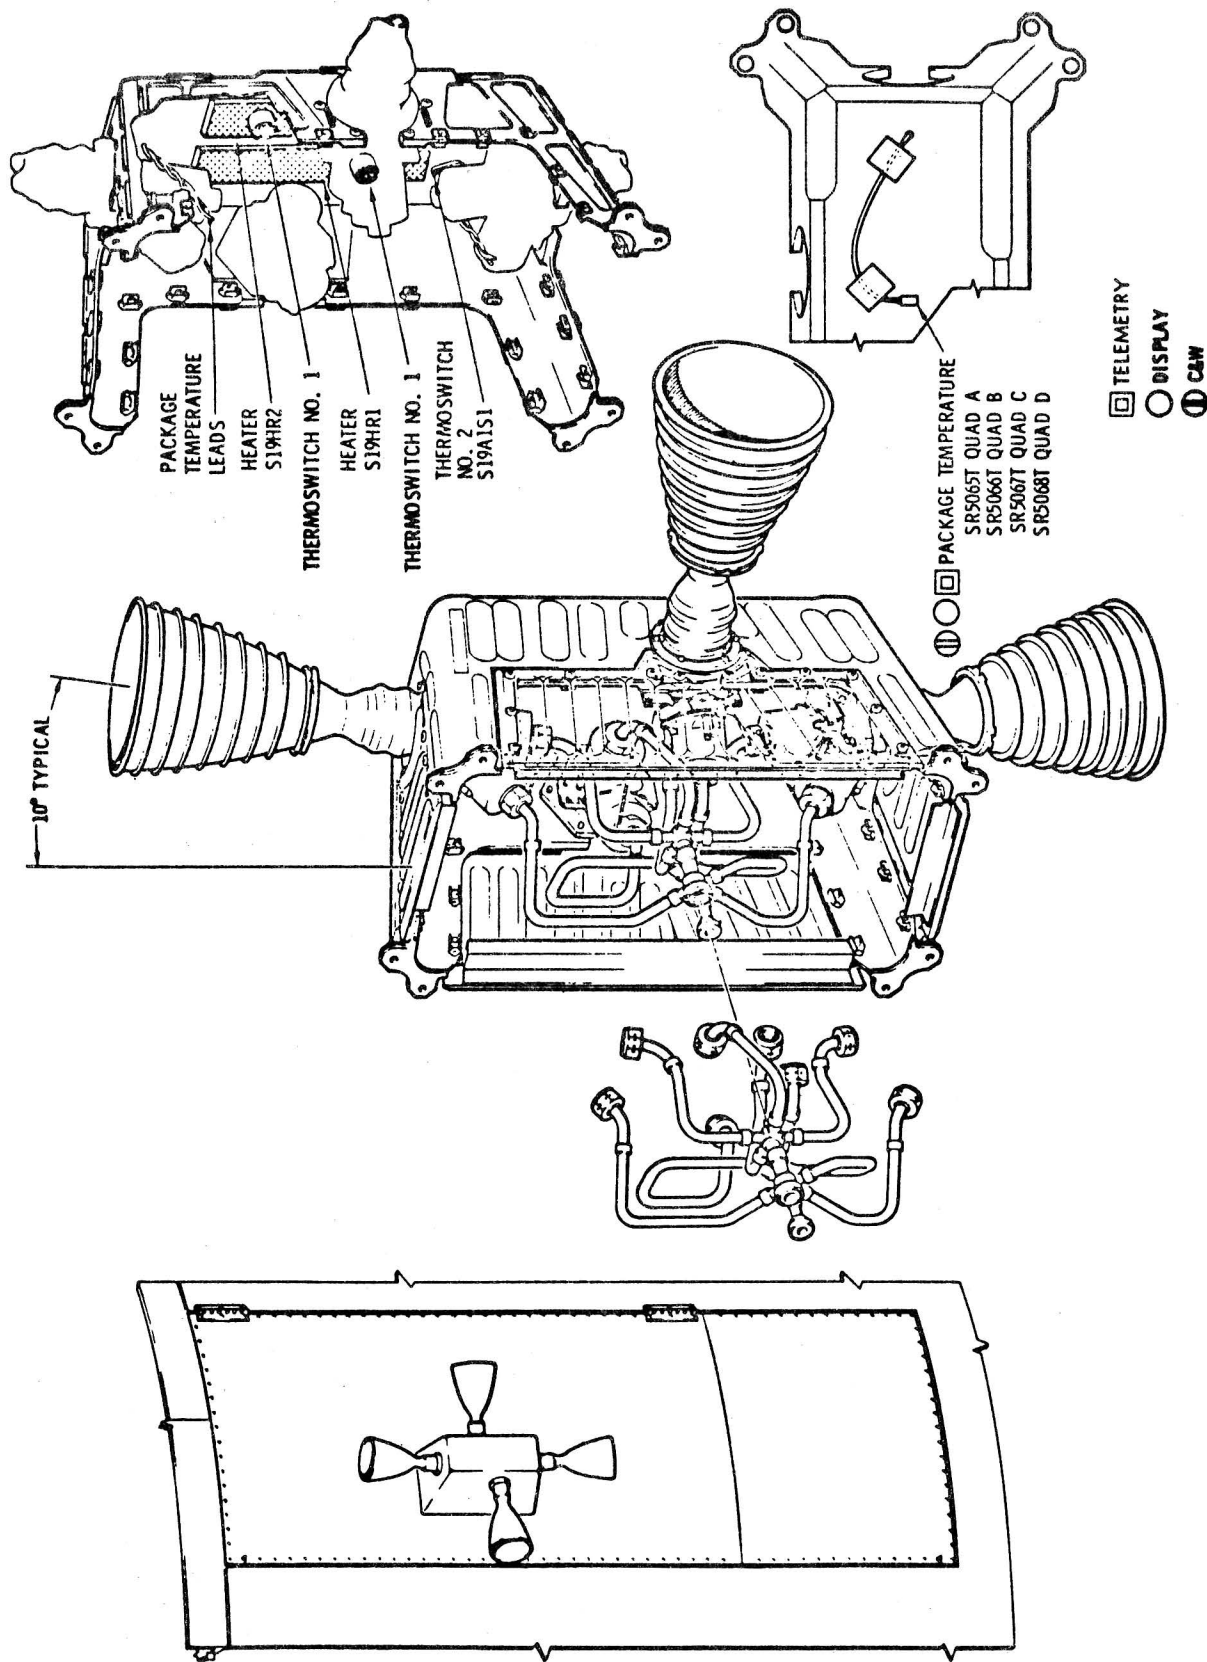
SM RCS ENGINE HOUSING.
